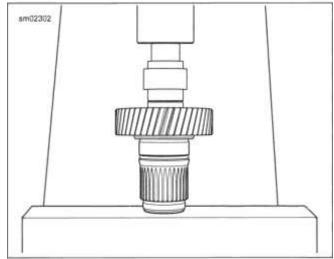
Installing Inner Needle Bearing in Main Drive
